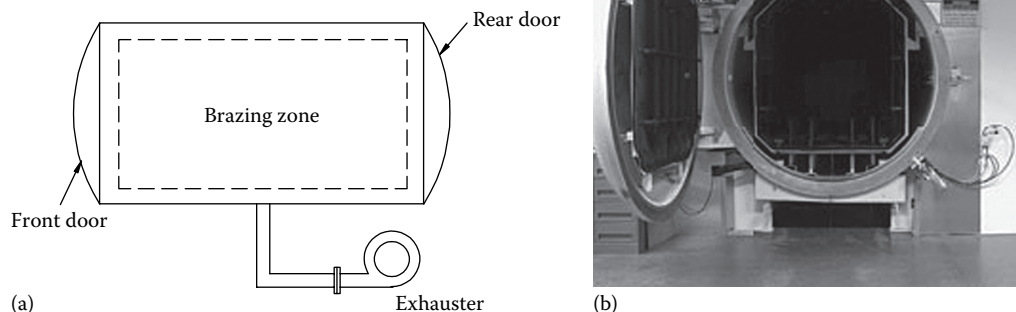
Vacuum-type batch furnace. (a) Vacuum-type batch furnace (Adapted and modified from Patrick, E.P., *Weld. J.*, October, 159, 1983) and (b) vacuum brazing furnace. (Courtesy of Lytron Inc. Woburn, MA.)
